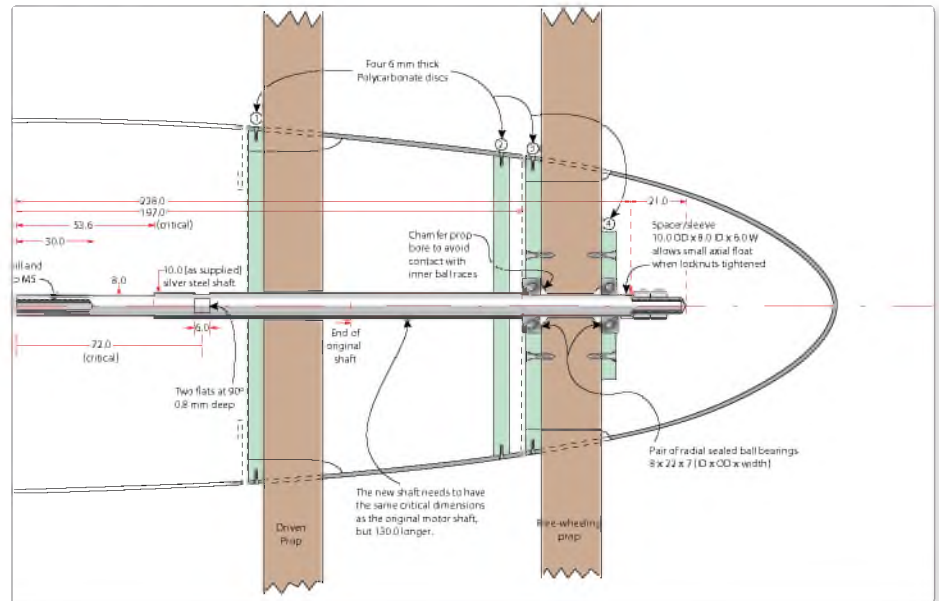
Wyvern simulated CR prop design Mk.6. The 9 inch long spinner and large overhang of the long shaft extension are evident in this assembly drawing
